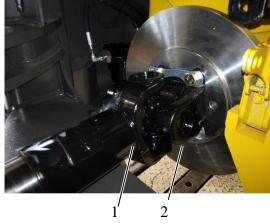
1 Transmission shaft 2 Transmission box front flange
